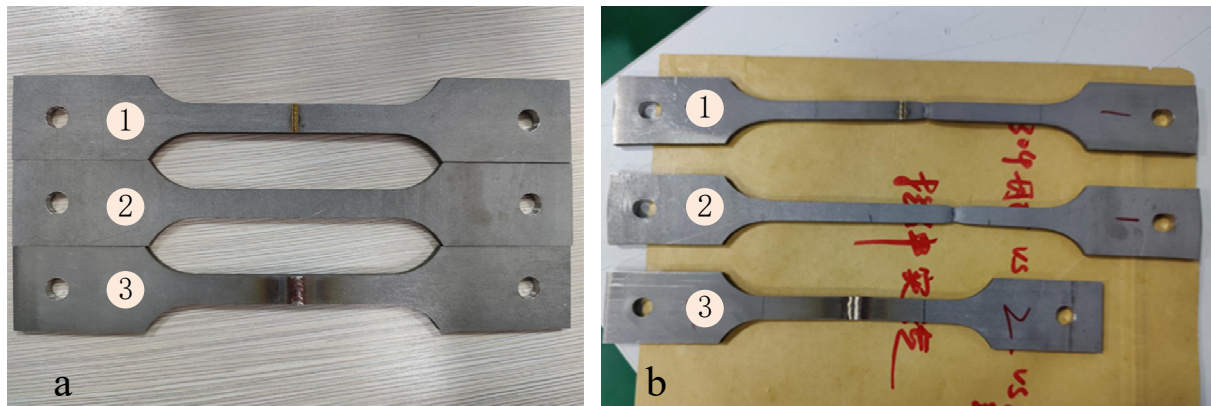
(a) Specimens before they fractured; and (b) specimens after they fractured.
